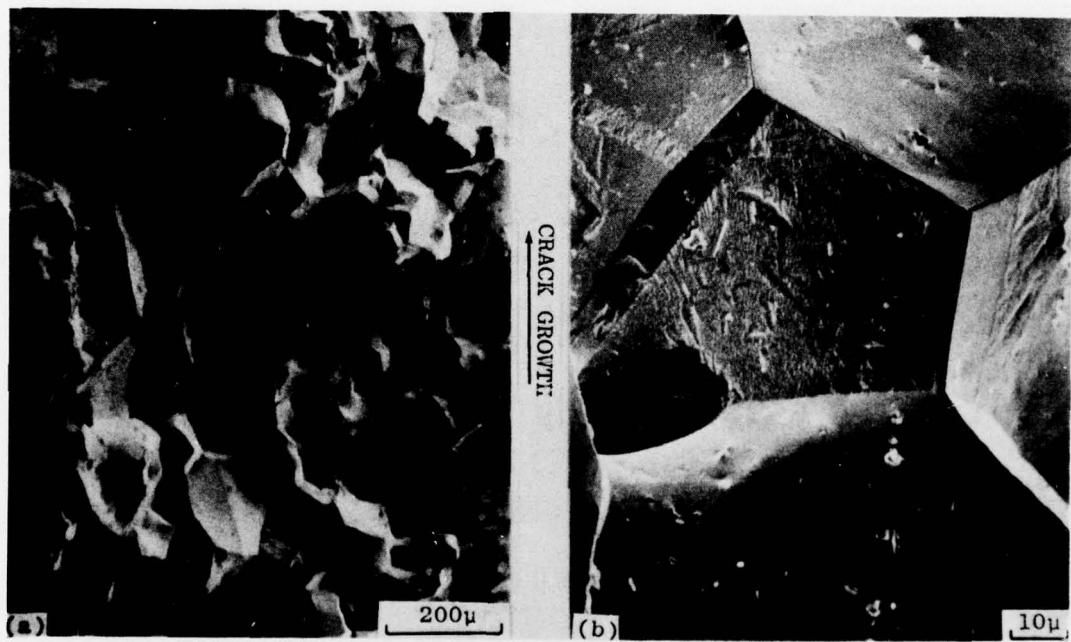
Fracture surfaces for heat treatment D
